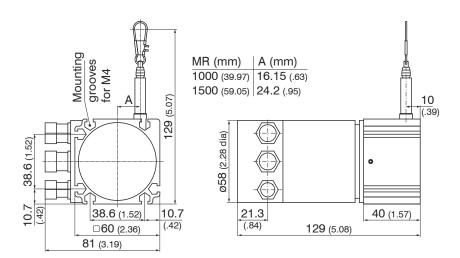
Dimensional drawing ... - FD60 - CAN/PB, dimensions in mm (inches), not to scale
